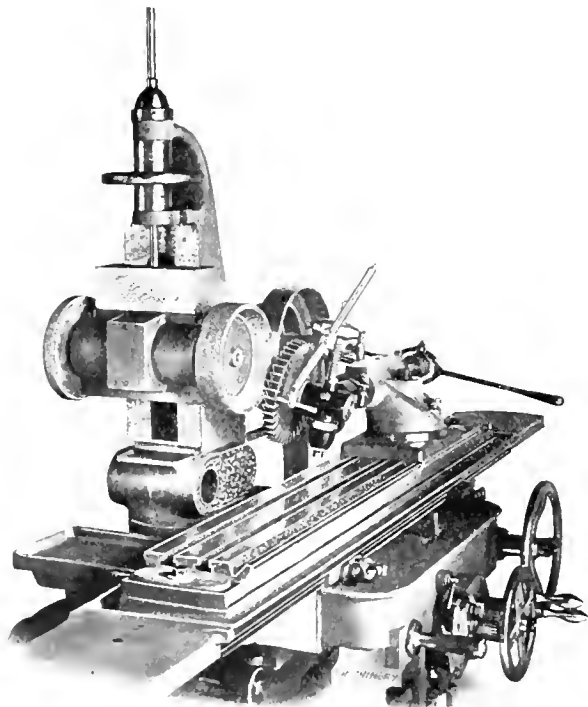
Grinding Side Teeth of a Milling Cutter with a Universal Holder Mounted in the Tail-stock.
